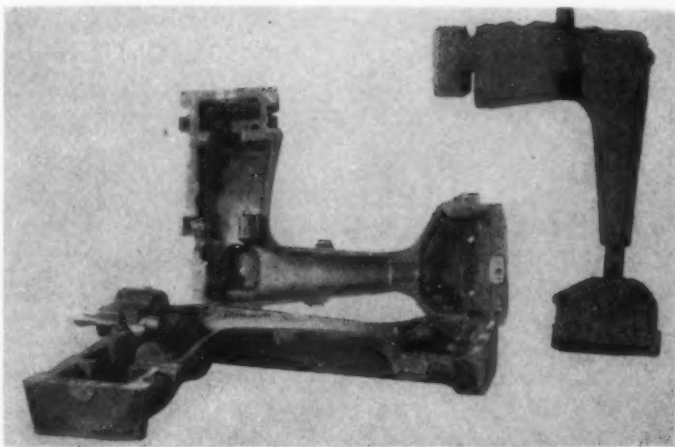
SEWING MACHINE HEAD CORE WITH CORE BOX.
